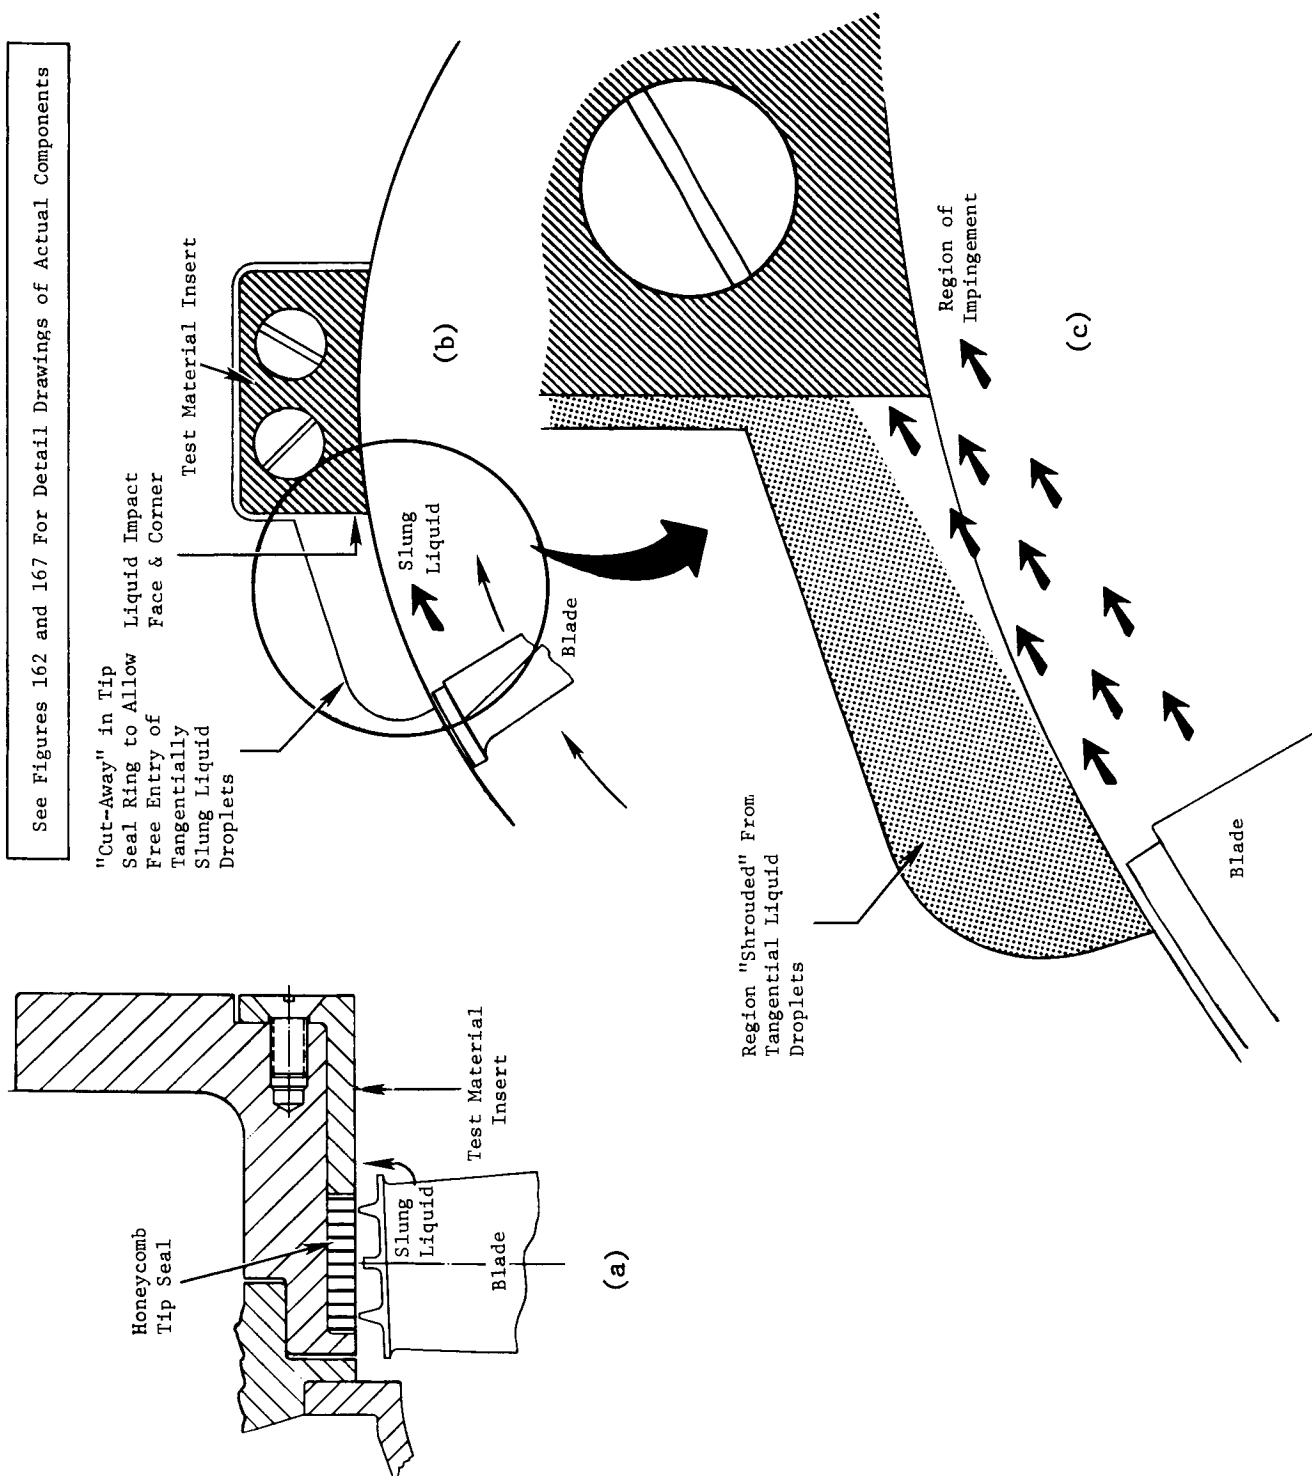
Installation of Corrosion/Erosion Test Material Inserts Aft of Stage 3 Rotor.
